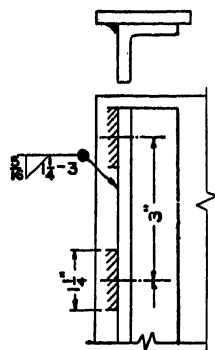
Structural Angle Fillet Welded to Plate.
